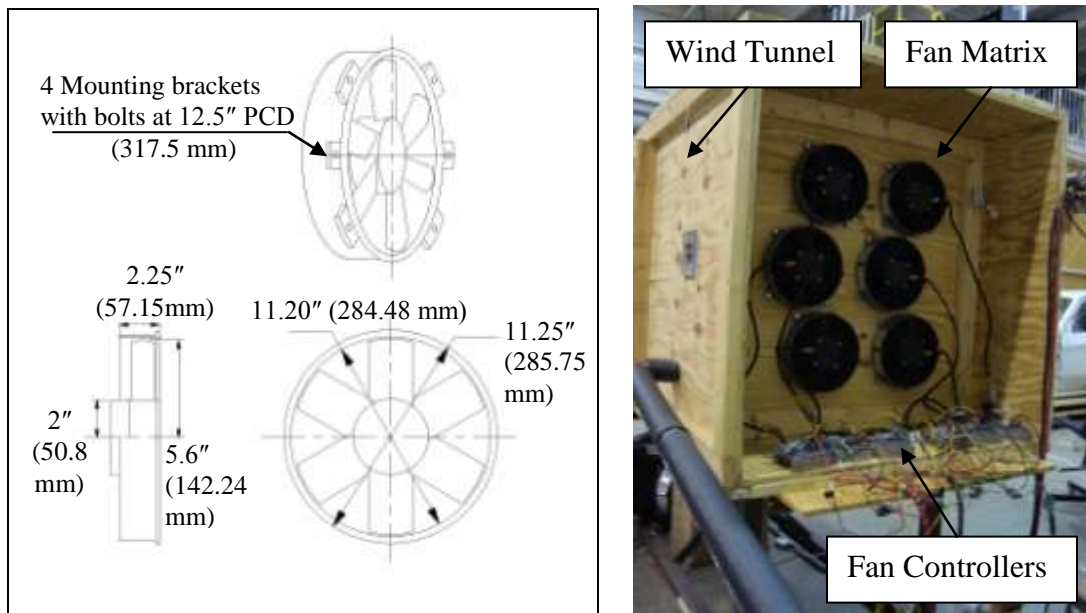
EMP fan dimensions and installation on the wind tunnel
